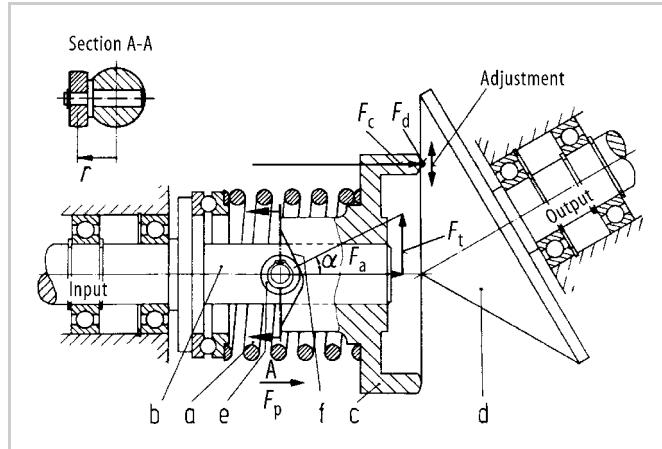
Continuously adjustable friction drive: *a* preload spring; *b* drive shaft; *c* cup wheel; *d* cone wheel; *e* roller follower; *f* cam formed on the cup wheel; *r* radius on which F_t and F_a act
